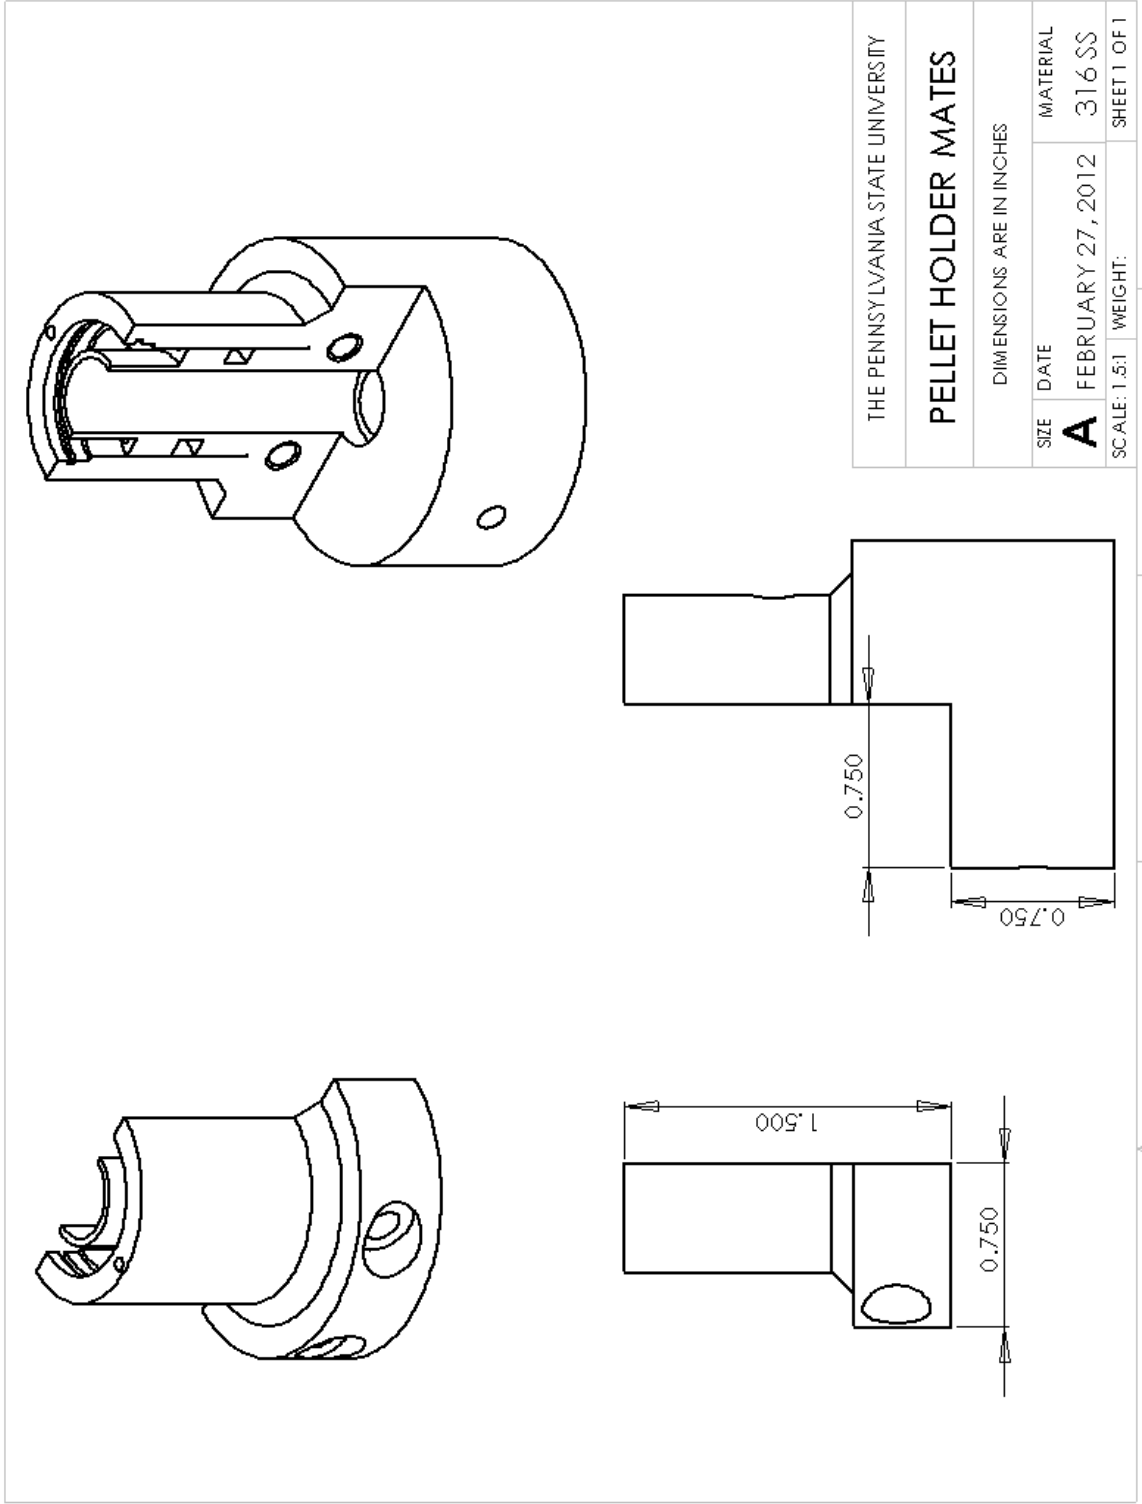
Drawing of machined mating components of pellet holder assembly for pressurized counterflow burner.
